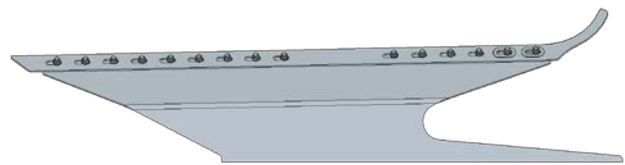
CAD model of side connection between tank and wagon chassis – sliding bolted connection
